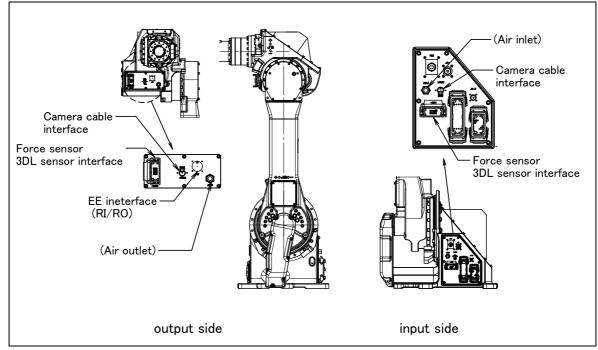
(d) Position of air supply and option cable interface (RI/RO) (When mechanical unit cable A05B-1125-H431 is specified)
